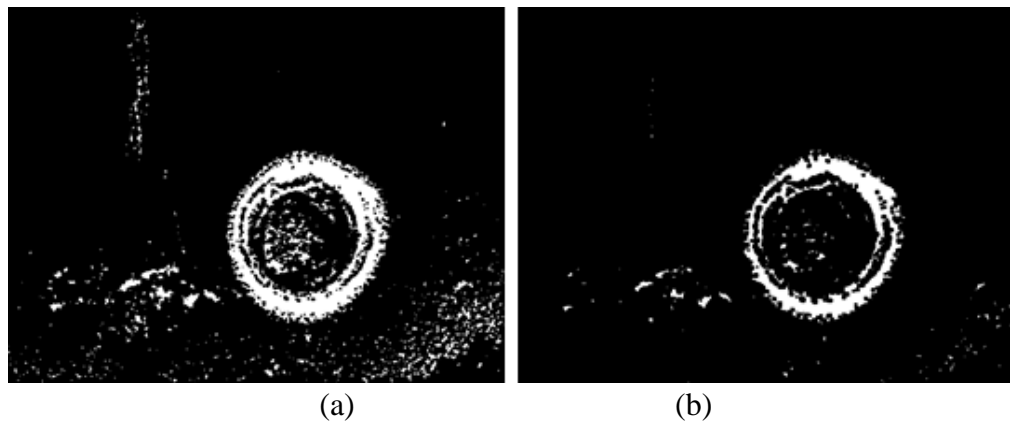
Image of welding spot before (a) and after (b) the image convolution processing.
